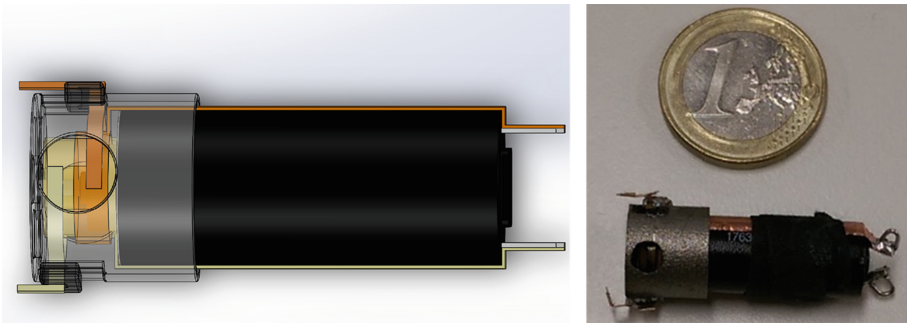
Design (left) and prototype (right) of the vibration actuator. A cover with a secondary brush was attached to the shaft of the DC motor, which was connected to the rotor.
